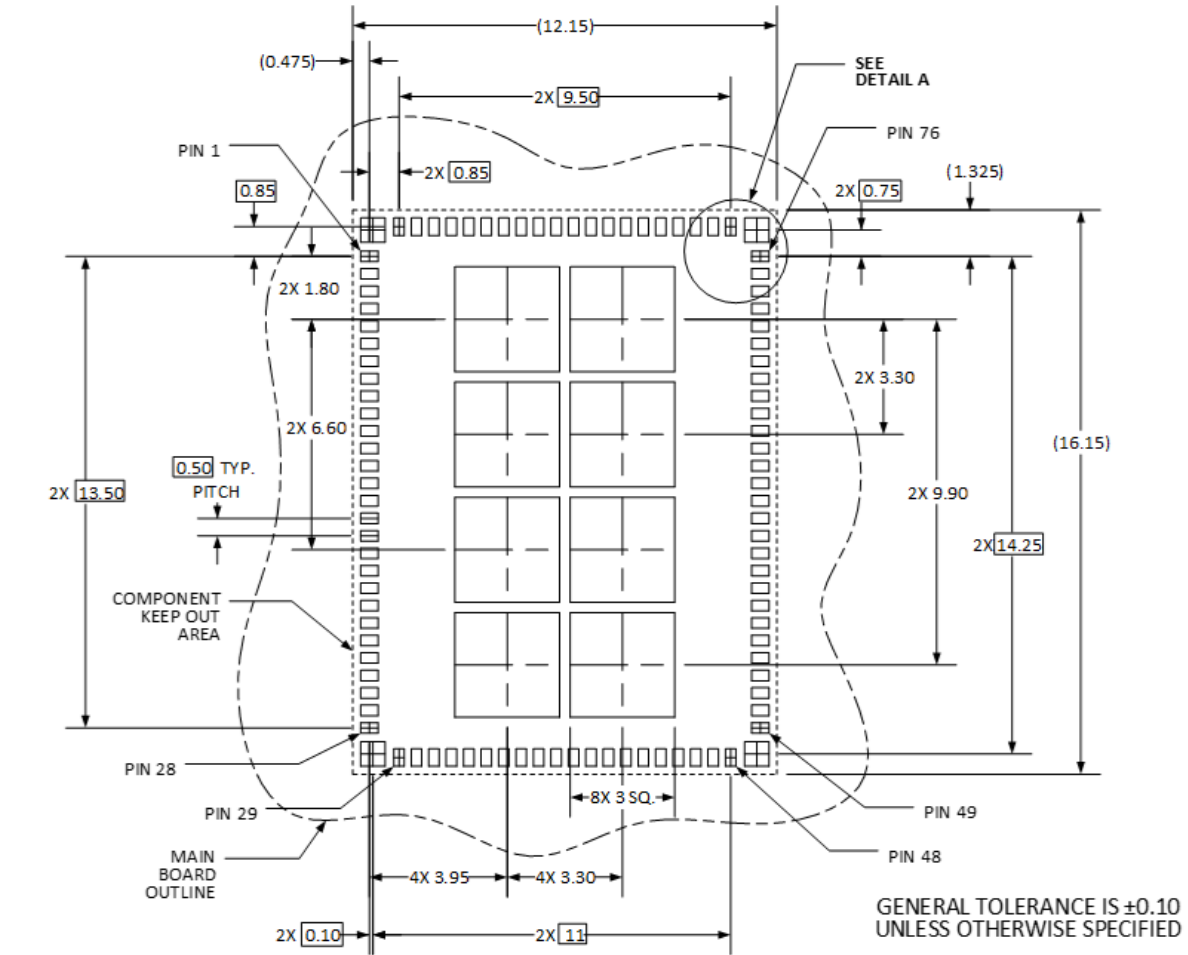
M.2 Type 1216-S3 Mechanical Outline Drawing Example
